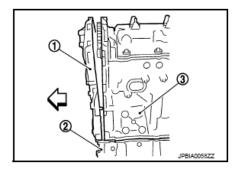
Identifying Front Timing Chain Case, Oil Pan And Cylinder Block Courtesy of NISSAN MOTOR CO., U.S.A.
